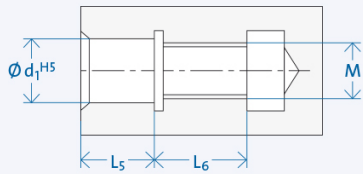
FOR GRINDING WHEELS ON THREADED PIN (PL)
